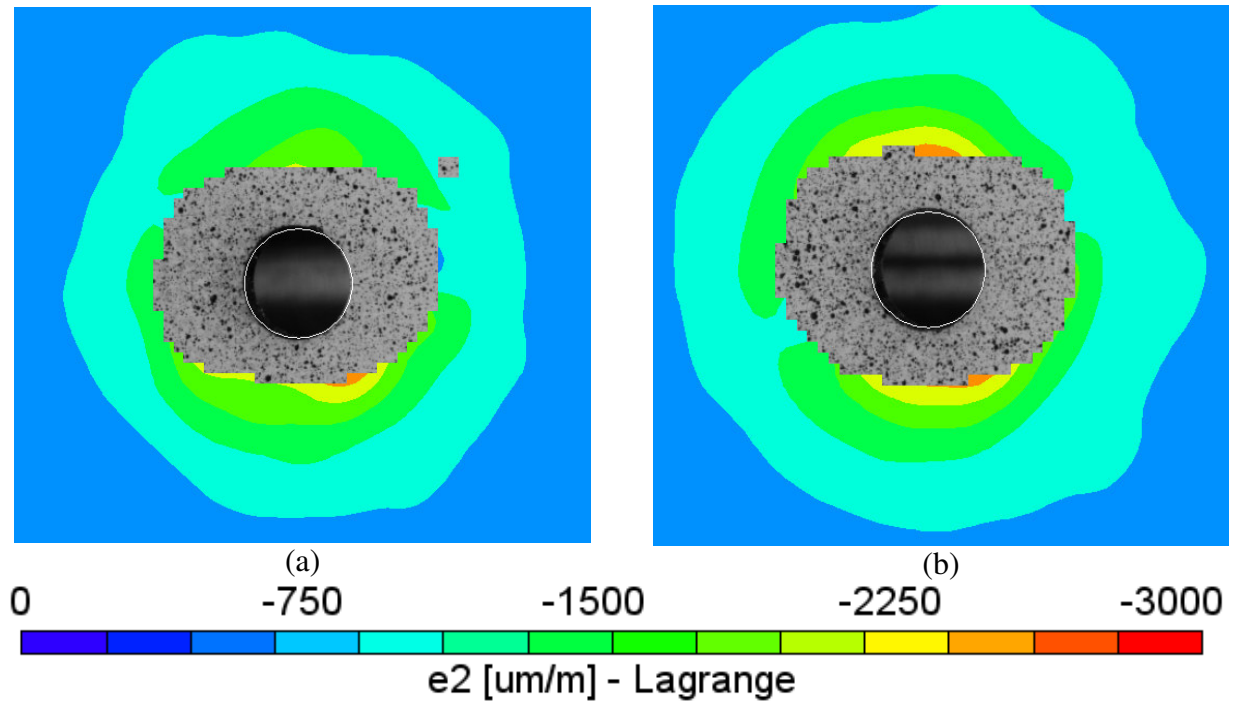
Minimum principal strains for 2024-T3 aluminum riveted coupon on driven head side for (a) specimen BL17 and (b) specimen BL19
